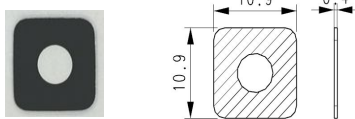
Specimen : Photograph and drawing of SM-G900F camera window glass
